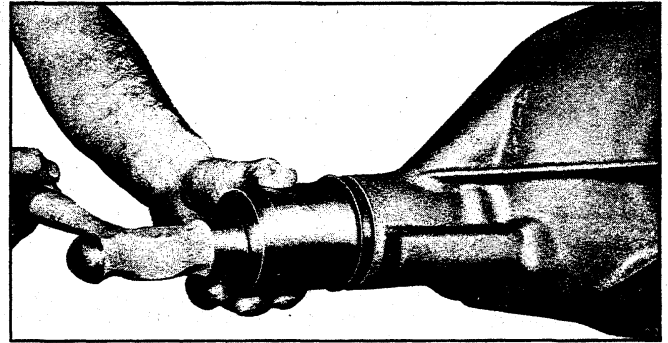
Drive Pinion Flange Oil Seal Installation (Heavy-Duty)
